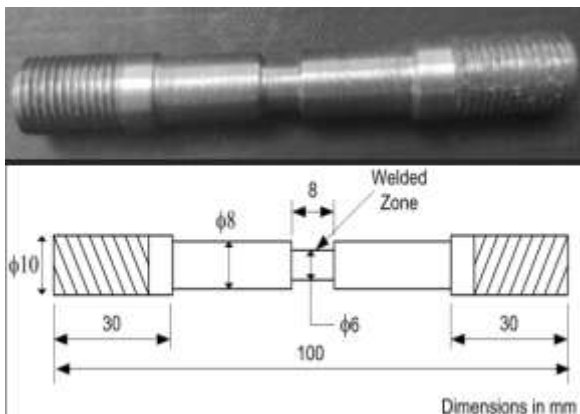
Photograph and schematic illustration of the welded tensile specimens
